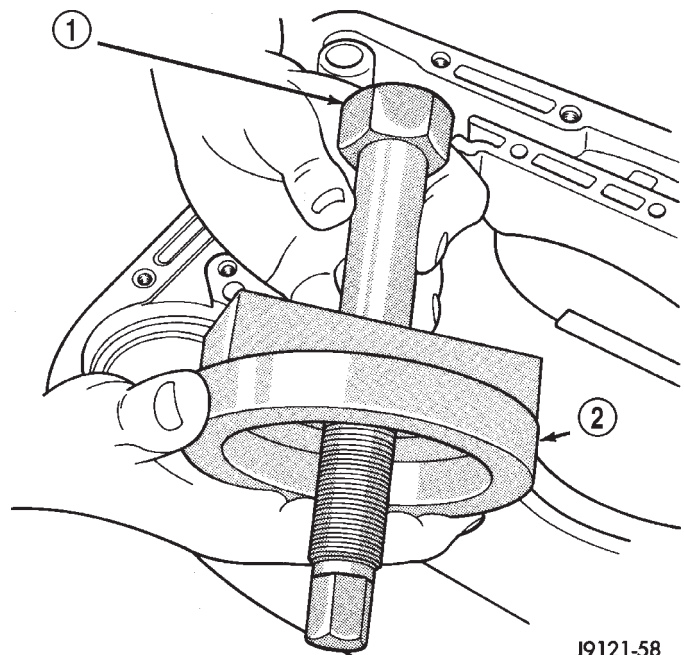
Assembling Clutch Cam Puller Bolt And Press Plate
